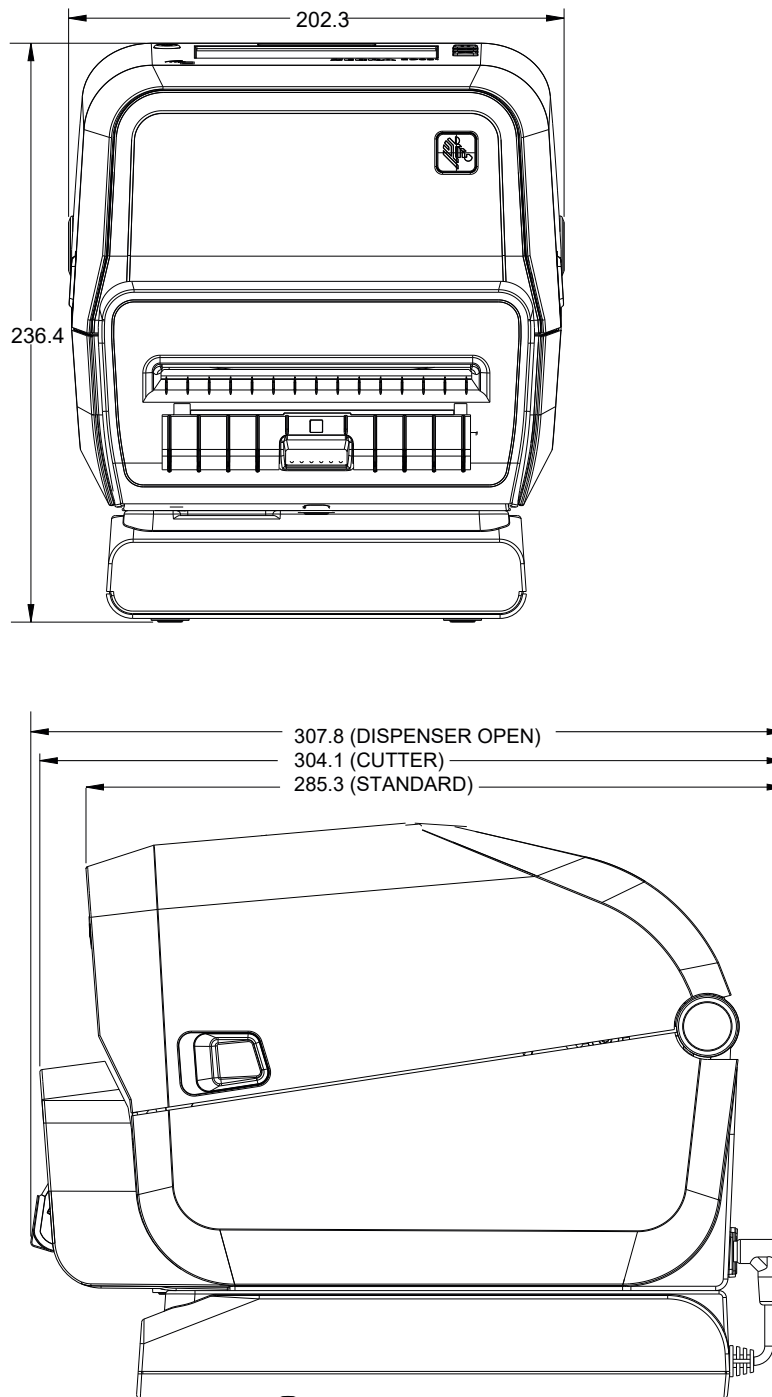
ZD421 / ZD621 Thermal Transfer Models – Dimensions for Printer with Cutter Option Installed
